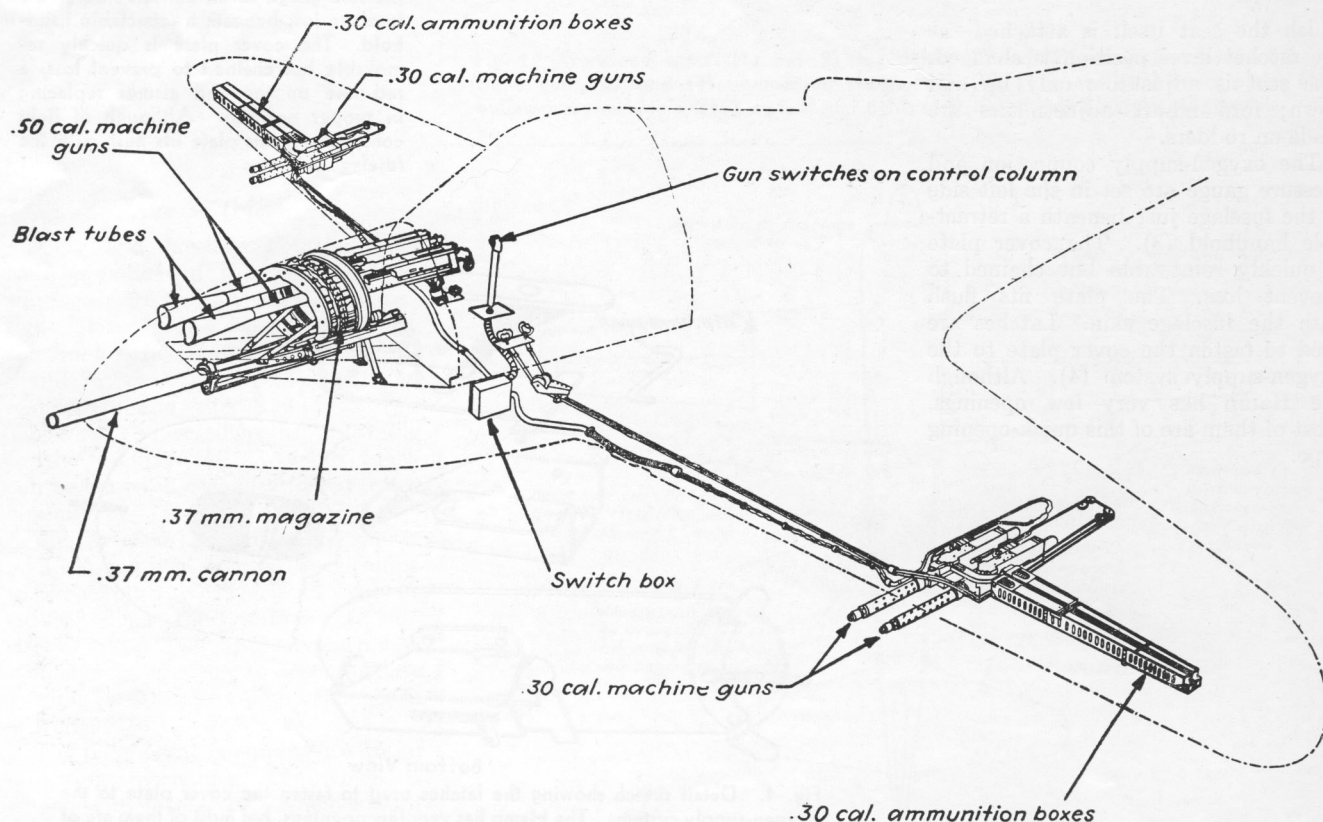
General arrangement of the 37-mm cannon and .50- and .30-caliber machine guns, ammunition boxes, and controls.
